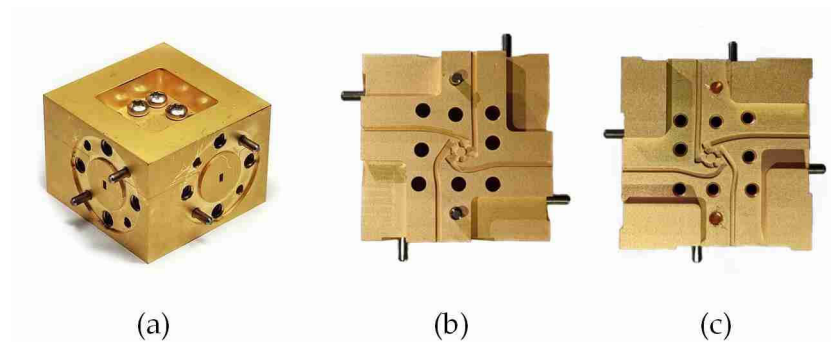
Fabricated filtering coupler. (a) The overall view. (b) The upper part. (c) The lower part.
